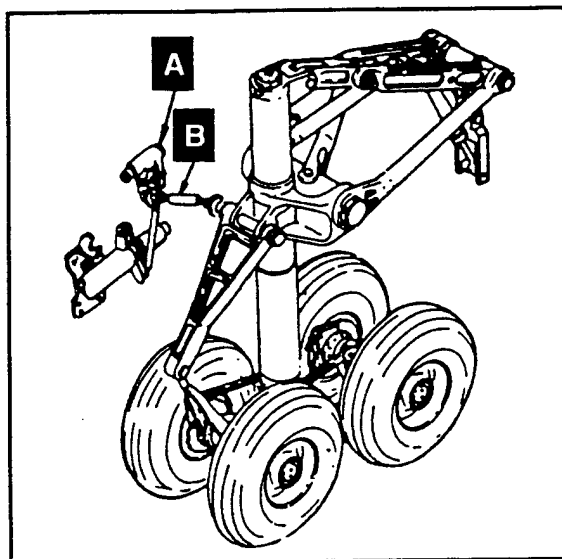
IVD Aluminum Coated Bellcrank Assembly Parts.
